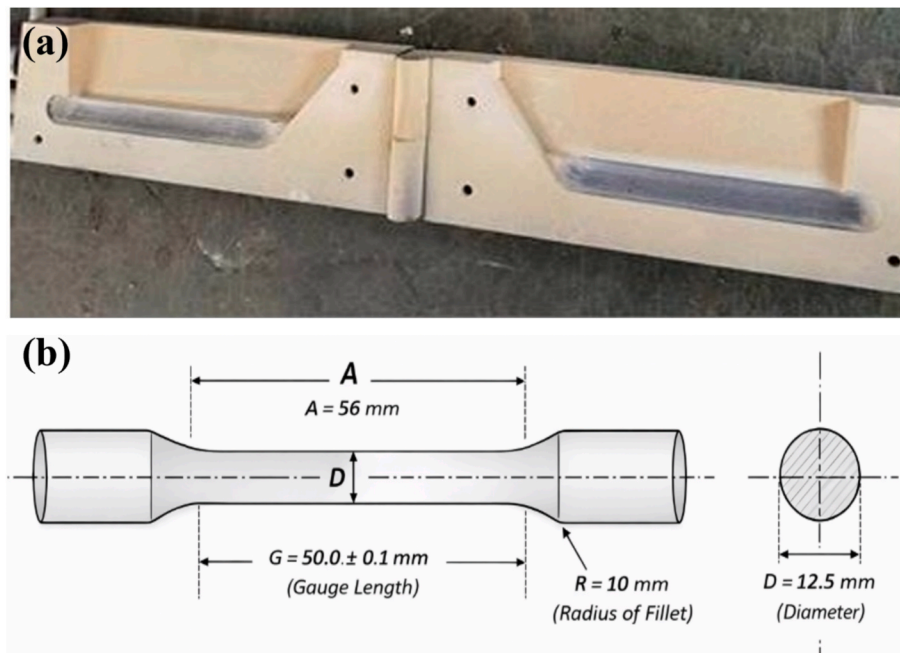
(a) BS L101 permanent steel mould, (b) tensile specimen machined from the BS L101 mould according to ASTM E8 standard.
